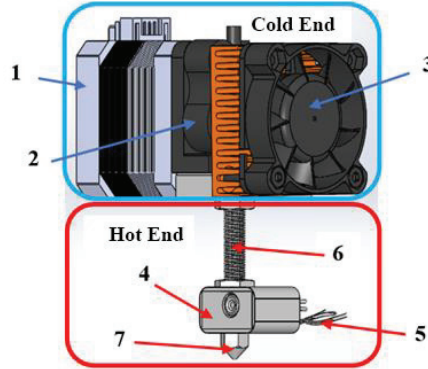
Standard printing head: 1 – stepper motor; 2 – filament feeding unit; 3 – cooling unit; 4 – heating element; 5 – thermocouple; 6 – guide tube; 7 – nozzle
